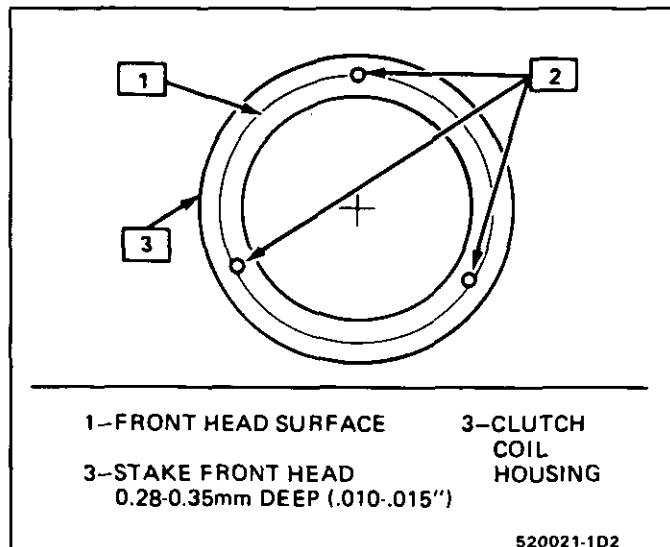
Details of Stakes In Front Head for Clutch Coil
